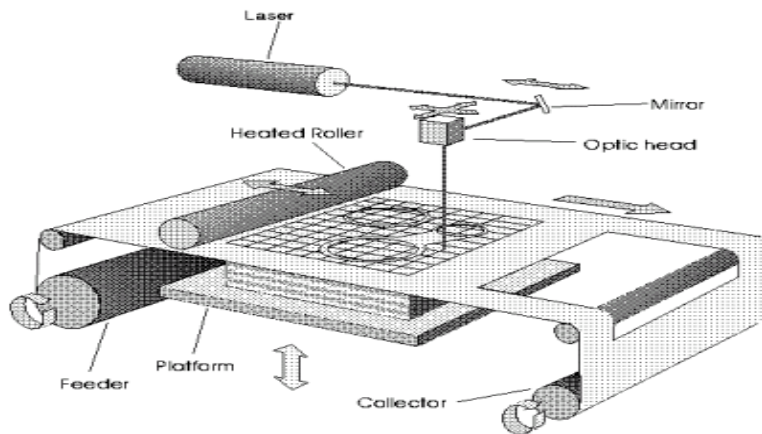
Schematic Diagram of Laminated Object Manufacturing
